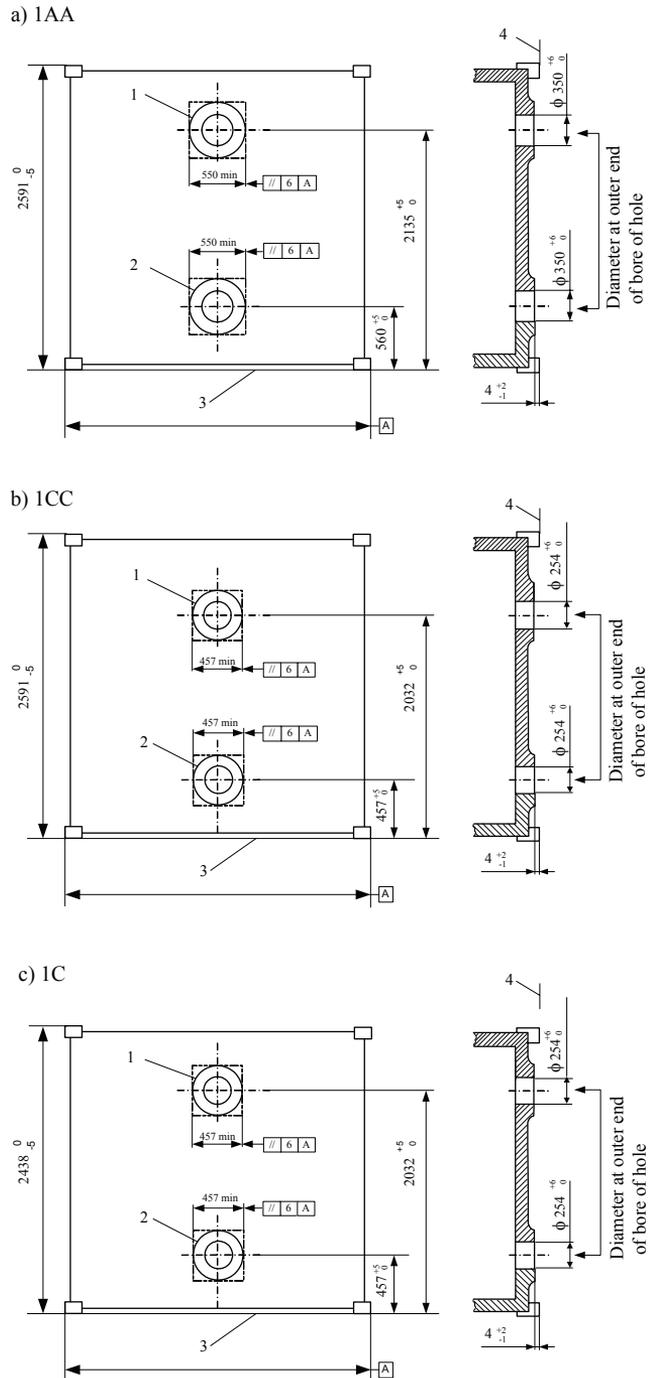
Ventilation openings in the end wall of 1AA, 1CC and 1C containers
